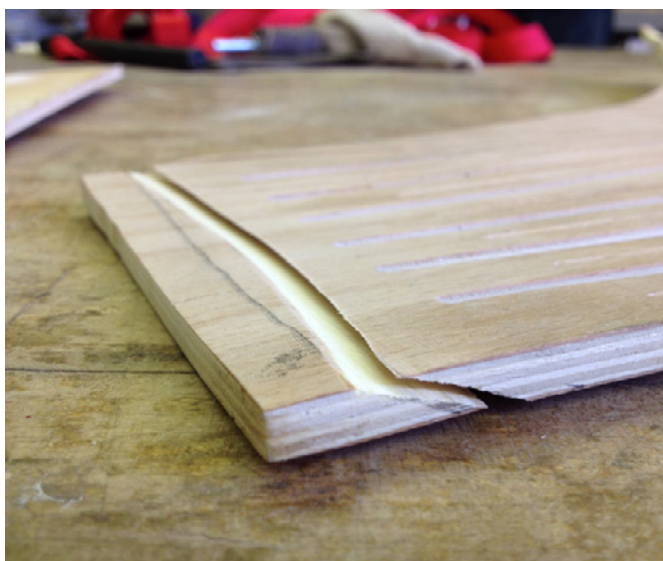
A scarf joint was cut at the bottom of the back splat so that it could be positioned in place without disassembling the chair.
